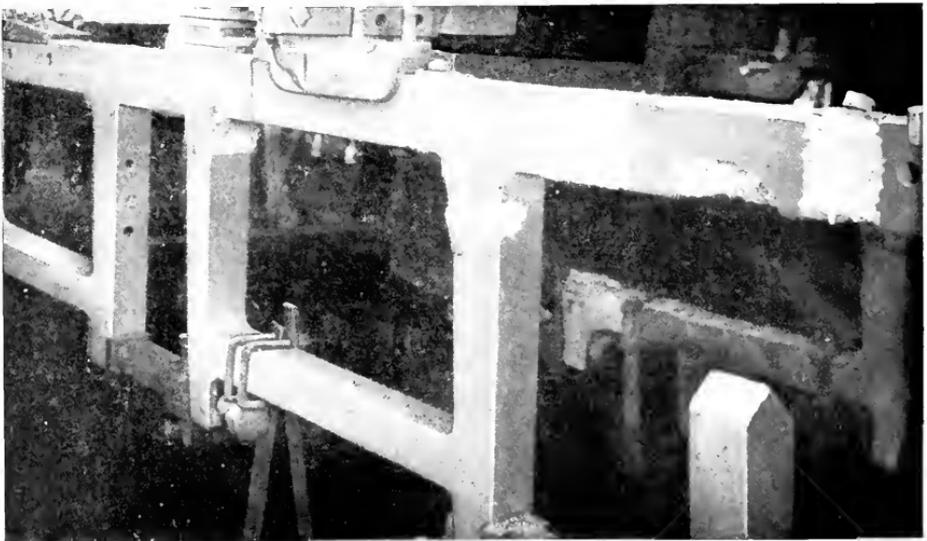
Left Side Frame of Locomotive; Break Partially Prepared for Welding; Rubbed Spots Built up and Cracks Chipped out and Welded; Electric Arc Process Used
